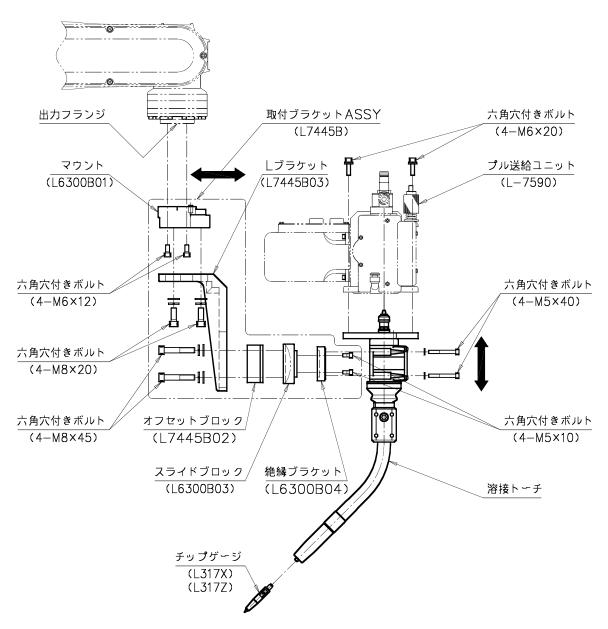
Mounting torch (mounting bracket) and pull feeding unit
